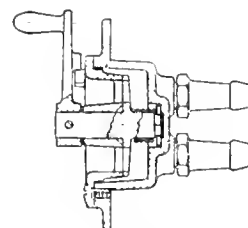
ALTITUDE-CONTROL-VALVE ASSEMBLY
